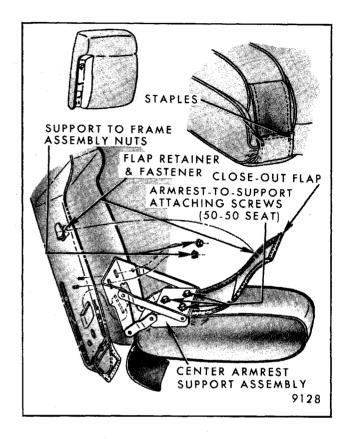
Front Seat Back Center Armrest - Cadillac E Styles 50-50 Driver's and Passenger's Seat
